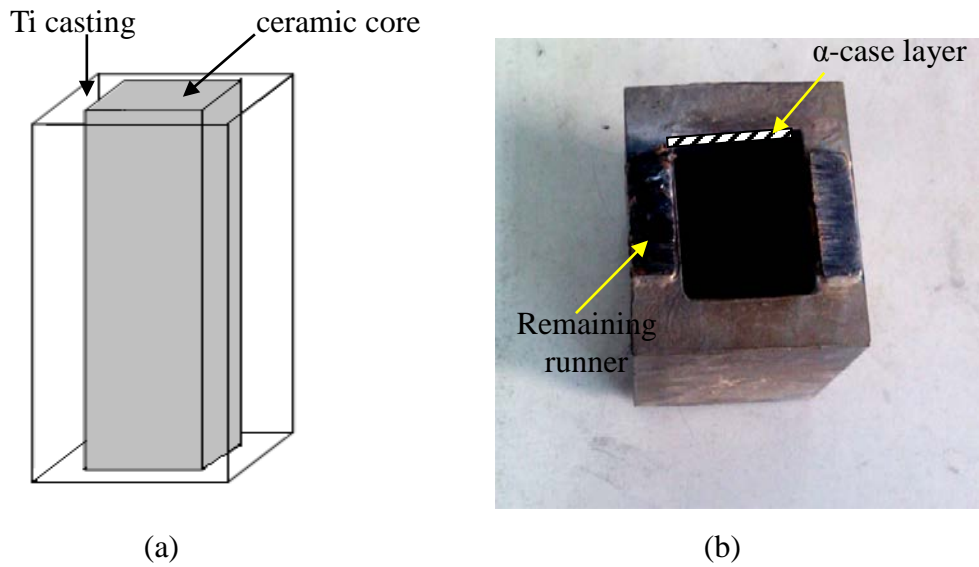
The shape of the casting cuboid tube used in this experiment. (a) Schematic of casting shape; (b) the casting after removal of the internal core.
